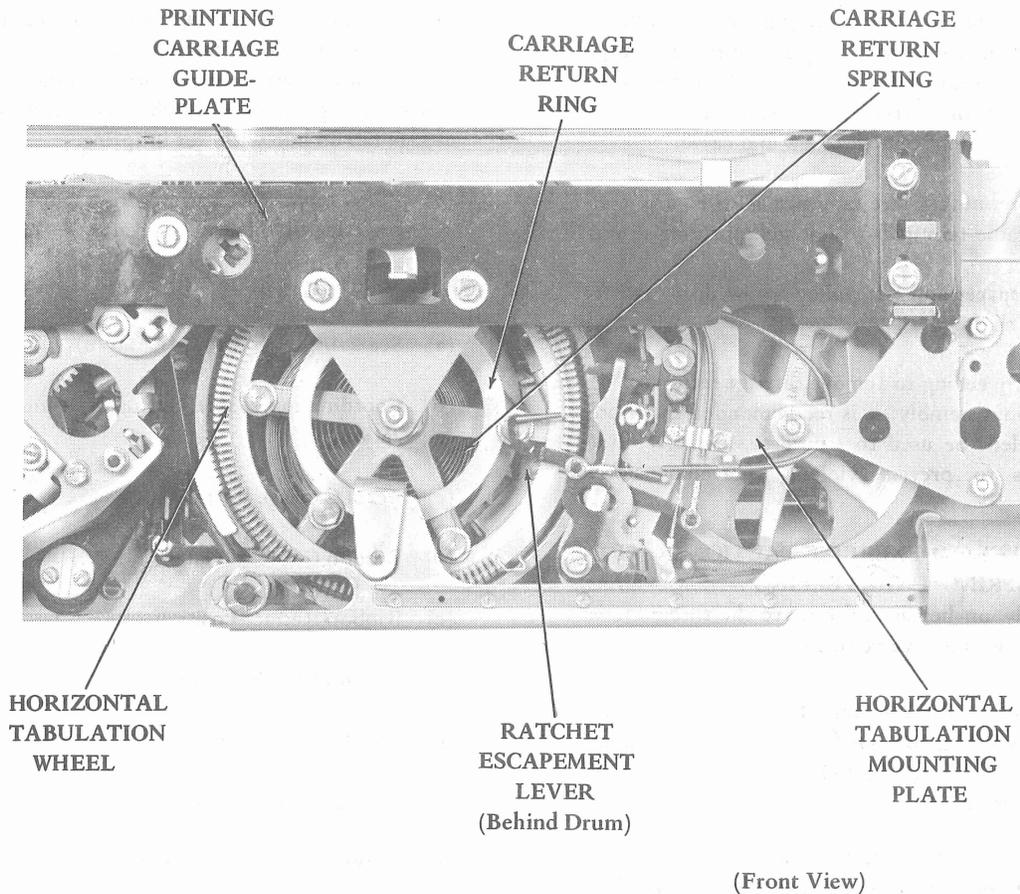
Wide Platen Unit Spacing Drum Assembly
